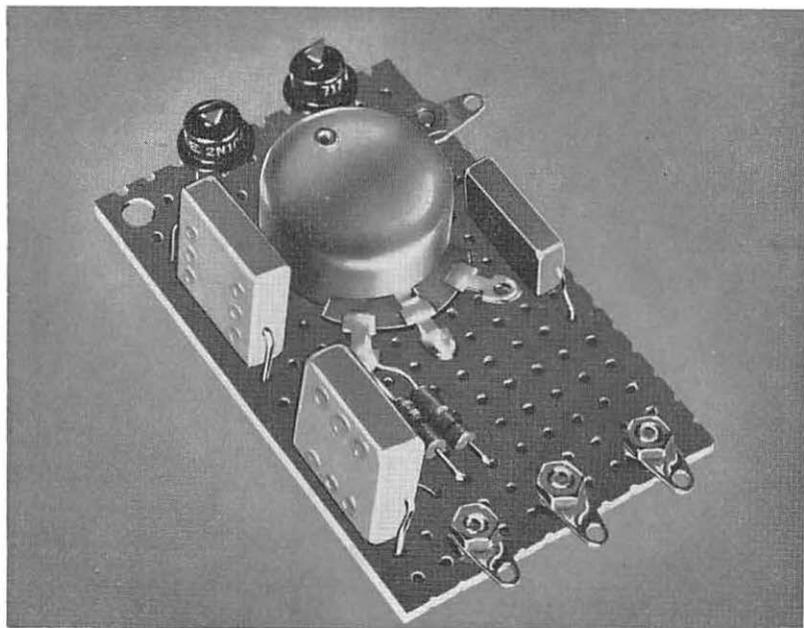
Multivibrator Circuit Board. See Fig. 7 for identification of components.
